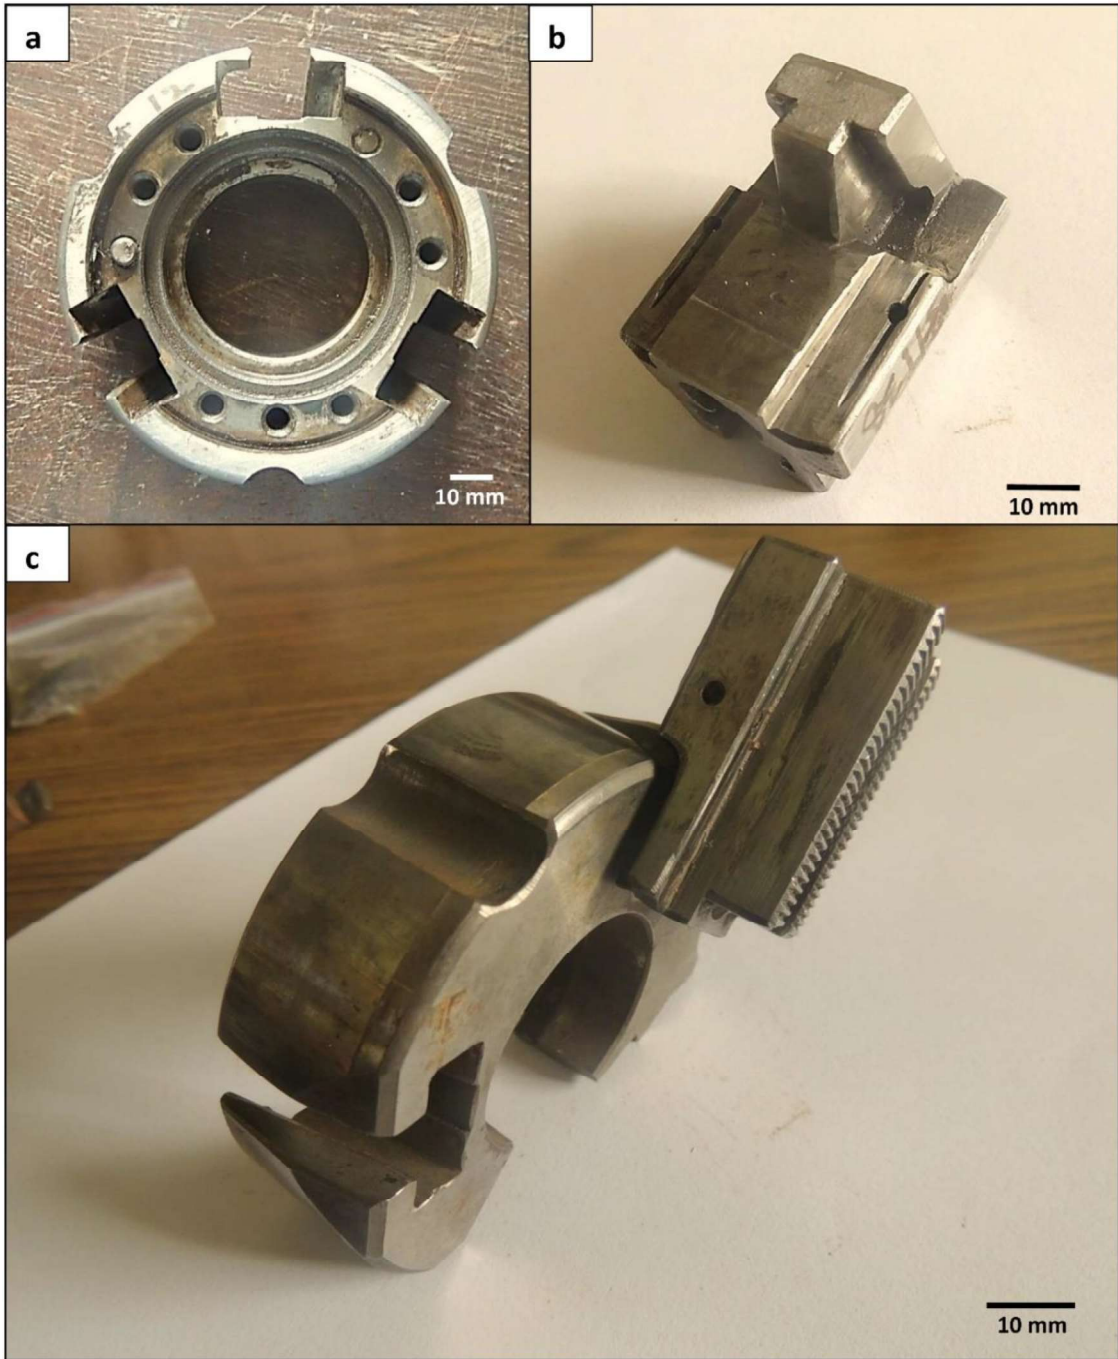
Images showing critical components of a hydraulic lathe chuck; (a) rear-side view of the plunger showing several steps, holes and three T-slots, (2) oblique view of a jaw-carrier showing the T-shaped projection, and (3) the jaw-carrier assembled in a T-slot of the plunger from the front-side.
